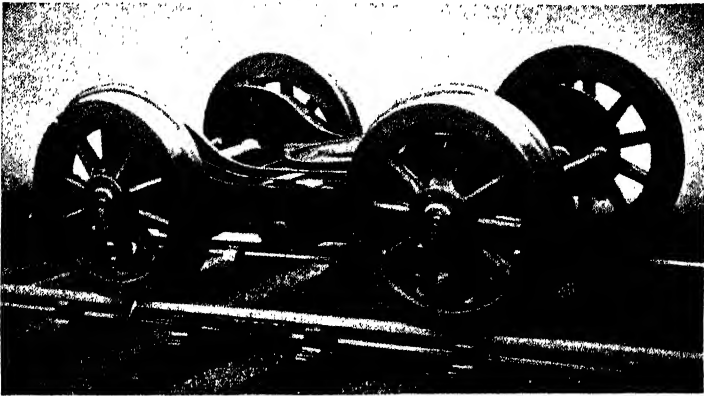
"Adams" Type of Bogie Fitted to 7½-in. Gauge Model G.C.R. Locomotive.
